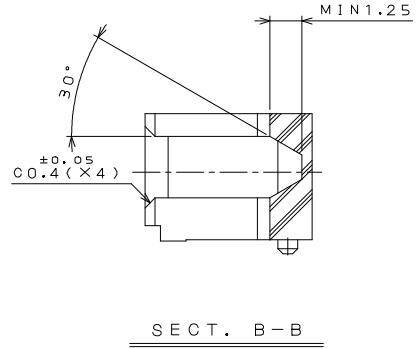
7.0 mm Slimline device plug connector interface dimensions Section B-B
